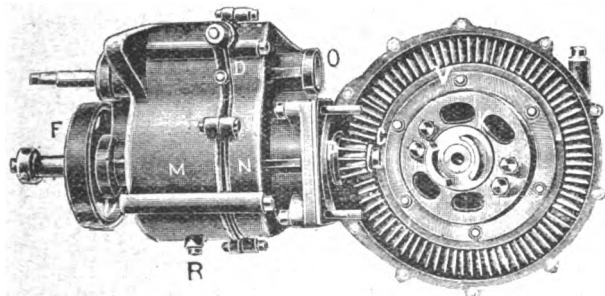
VIEW OF DE DION CHANGE-SPEED GEAR BOX AND BEVEL GEAR CONNECTION TO REAR AXLE.
